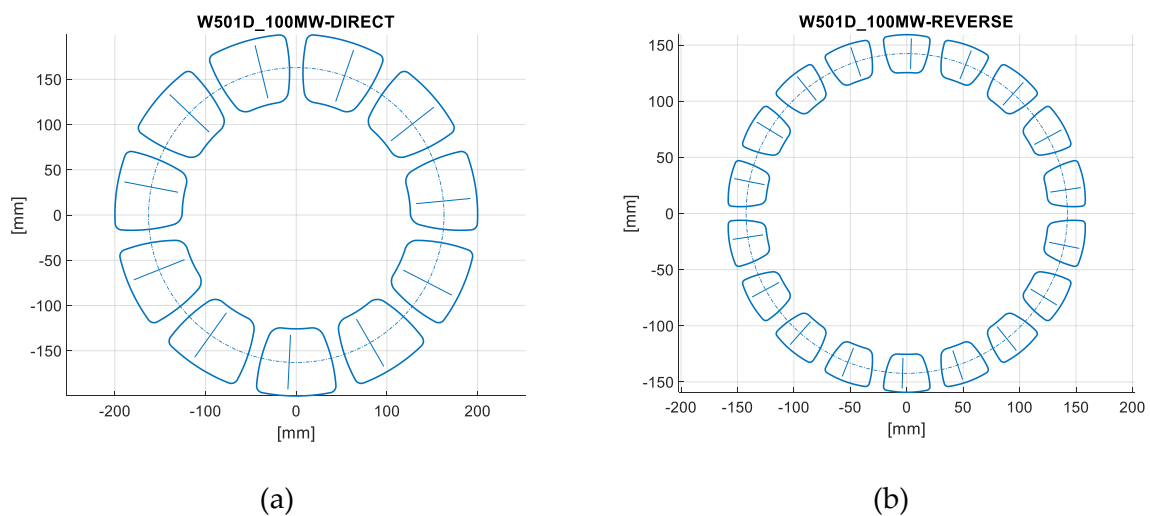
Geometry of thrust bearing analysed: (a) direct side; (b) reverse side
